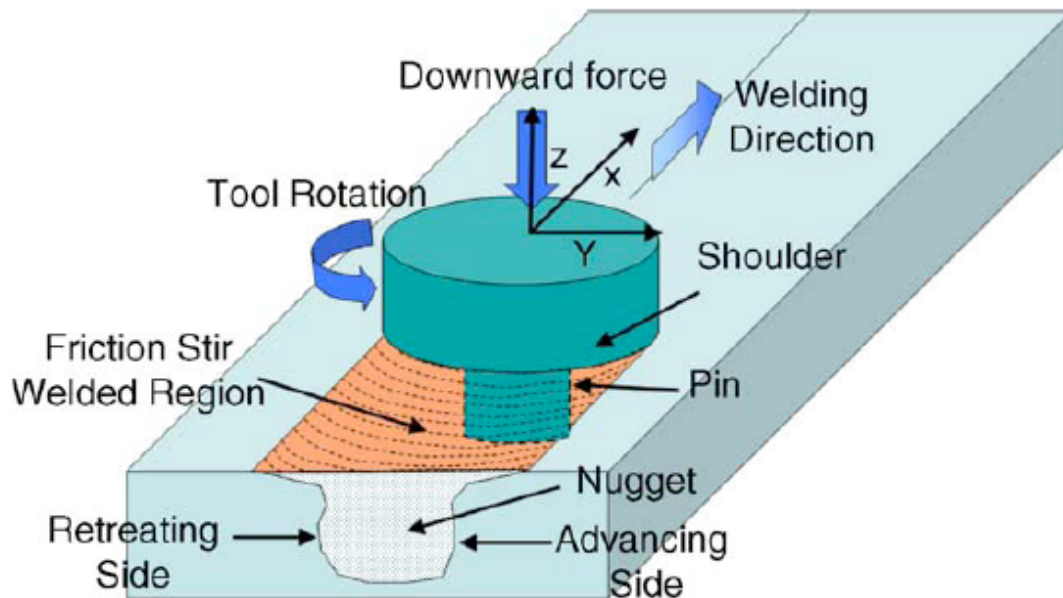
FSW diagram for typical butt weld configuration [Mishra 2005]
